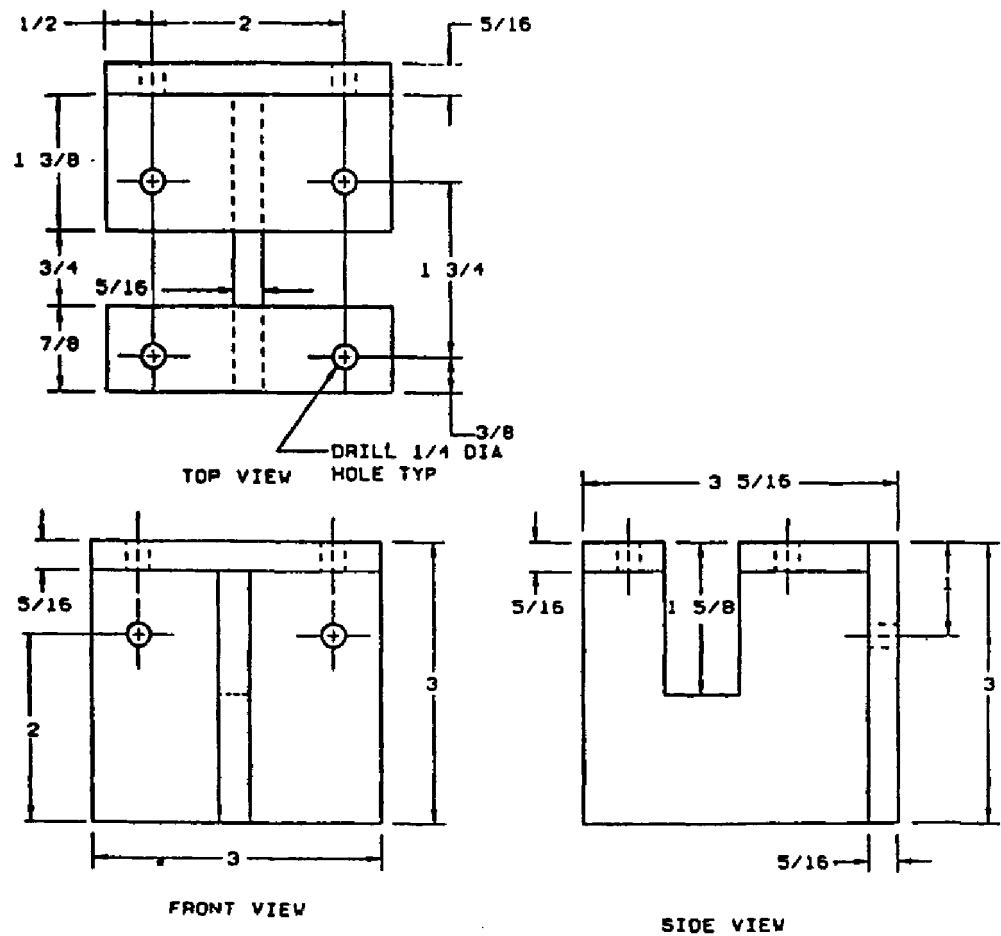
Automatic Combustion Control Calibration Panel Drawing (Sheet 13 of 13)
